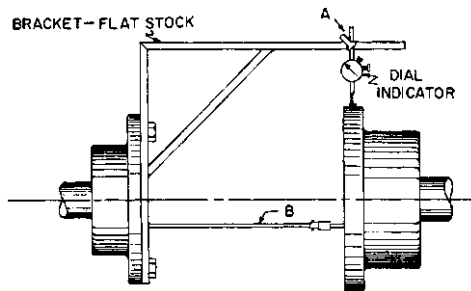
Use of dial indicator for face-and-rim alignment of spacer-type coupling
